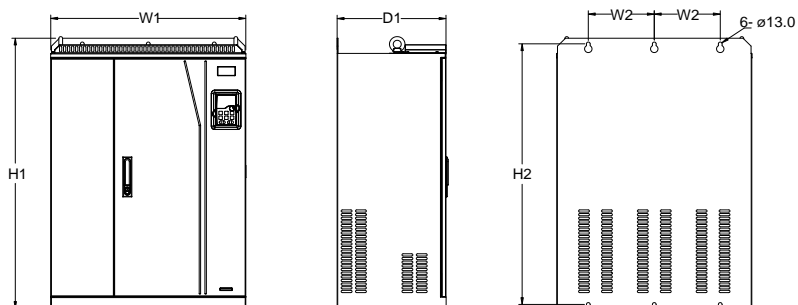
Wall mounting for 380V 220–315kW VFD models
